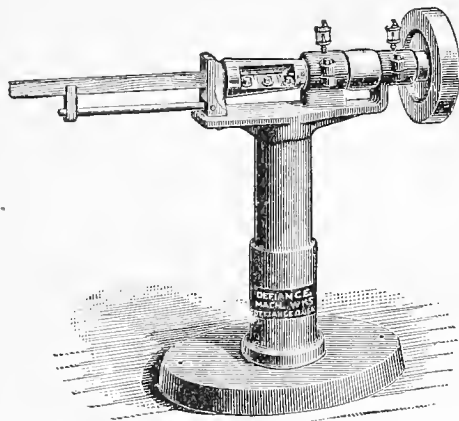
HOOP-BAR CHUCK POINTING MACHINE.
